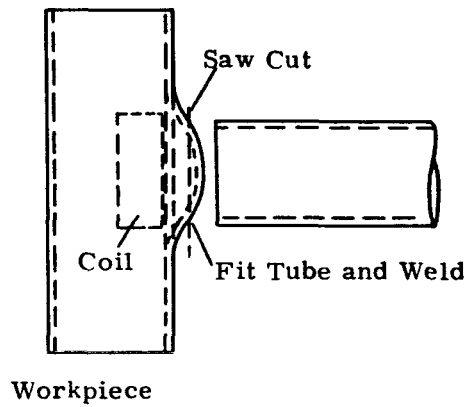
Making "Tee" assembly in large diameter pipe or tubing. Bulge produced by magnetic pulse is cut as shown, and stem is welded on.
